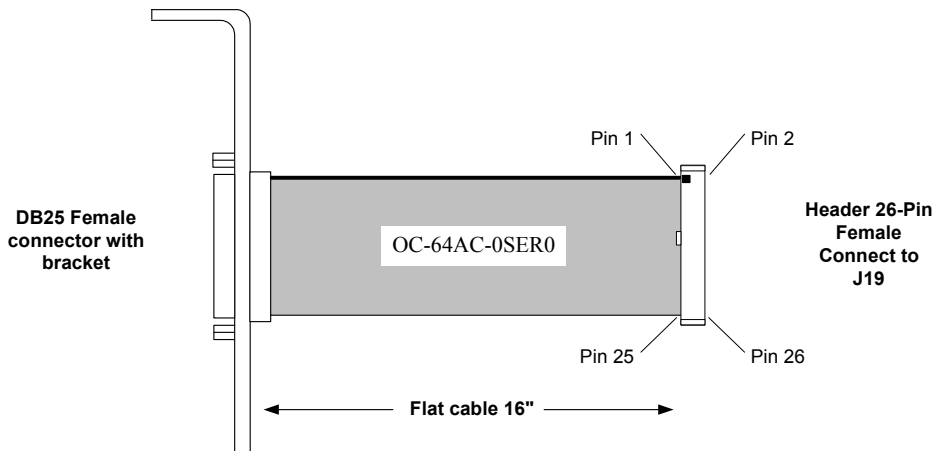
OC-64AC-0SER0 serial port/strobe cable assembly
